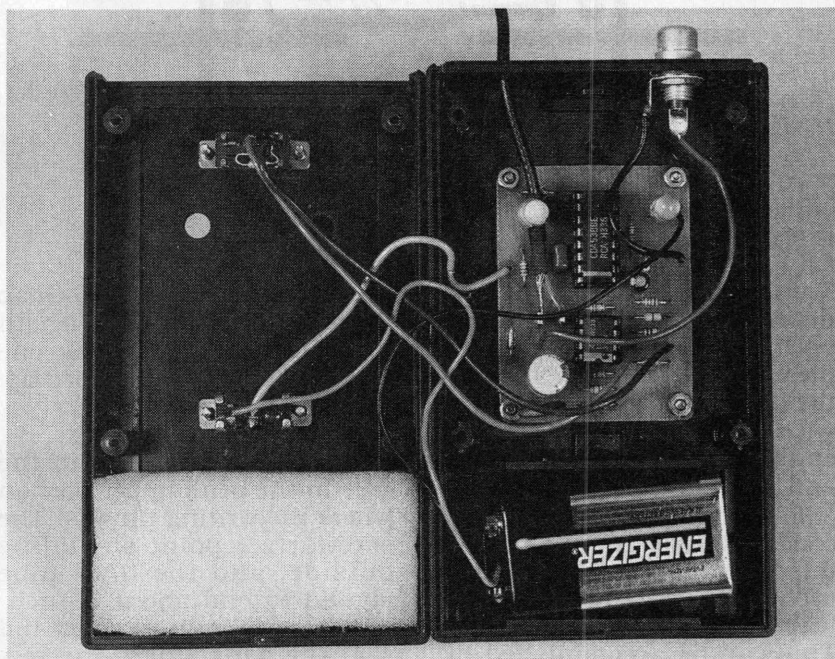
THE INSIDE OF THE COMPLETED UNIT. You can use the same case (see the Parts List) or any other that will accept the board and a 9-volt battery.
